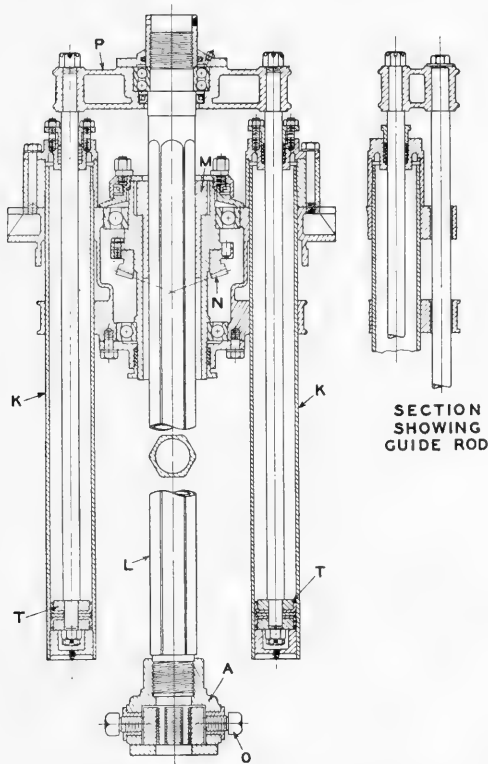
Mechanism for imparting rotation and feed to drill pipe of hydraulic feed type drill; (A) drill chuck; (K) hydraulic feed cylinders; (L) drive rod; (M) drive rod bushing; (N) beveled gearing; (O) set screw; (P) yoke.
